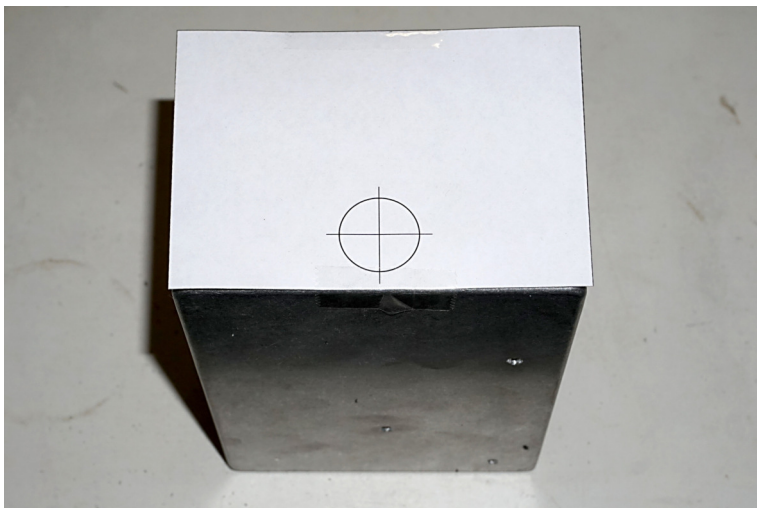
The pattern for the USB cable inlet hole. Make sure to check that the hole is drilled on the correct side of the box. When viewed from top as in the photo, the two Arduino mount holes have to be on the right side. Use a 19 mm diameter holesaw to drill the USB cable inlet.
